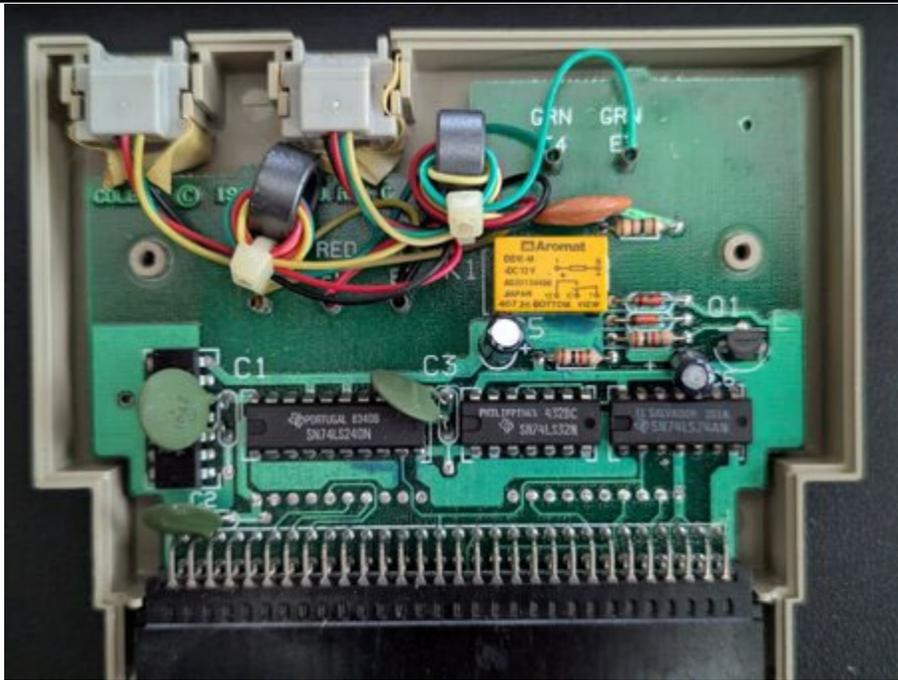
Released ADAM AutoDialer interior — PCB #42730 Rev C with relay and harness
